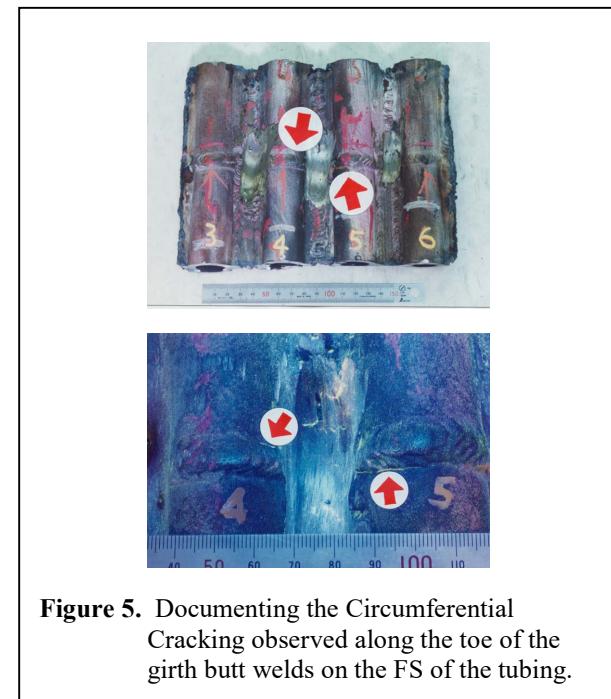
Documenting the Circumferential Cracking observed along the toe of the girth butt welds on the FS of the tubing.
